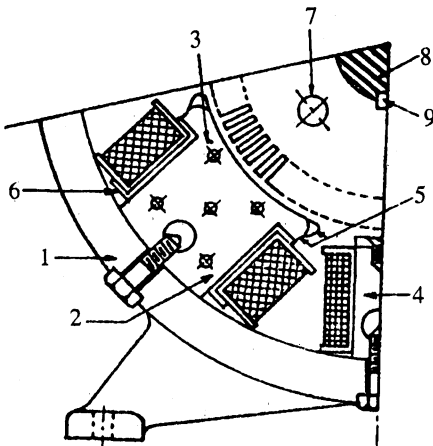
D.C. machine, 1-yoke, 2-pole core, 3-pole shoe, 4-interpole, 5-interleaved assembly, 6-insulated shield, 7-axial duct, 8-shaft.
